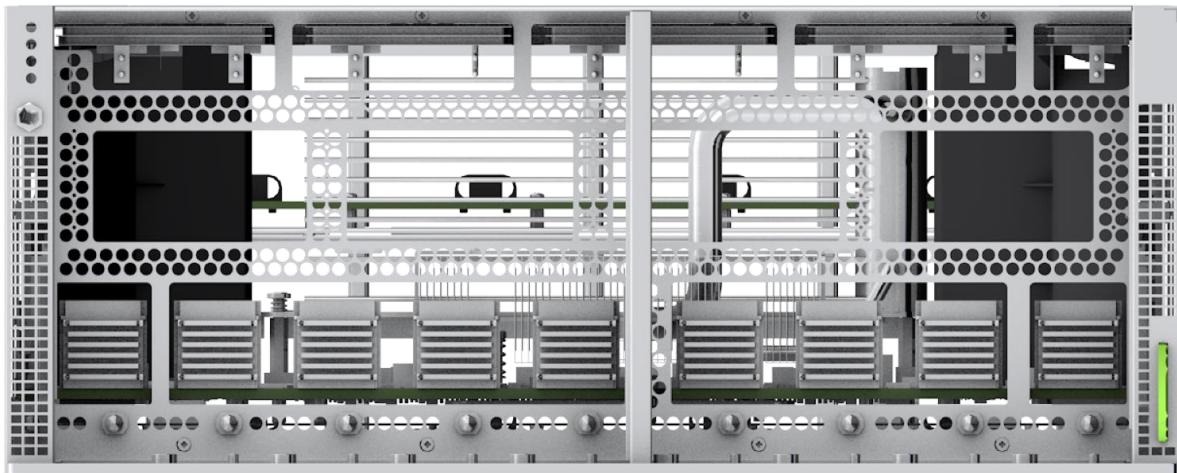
Minipack Chassis Middle Frame with Venting Holes\
